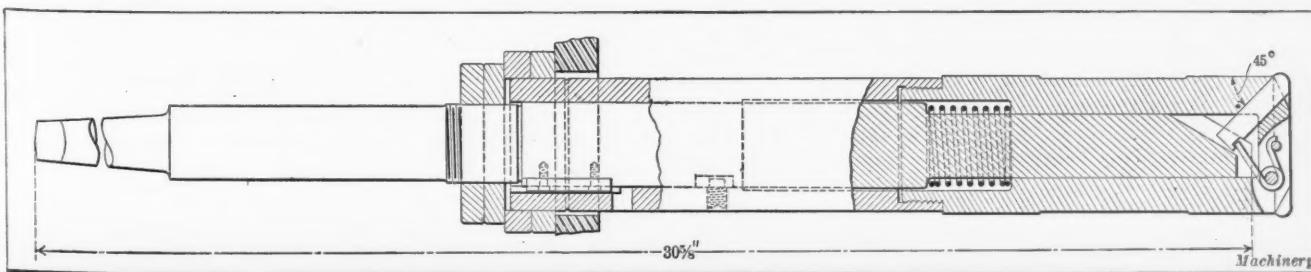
Detail View of Tool for recessing End of Automobile Engine Cylinders
